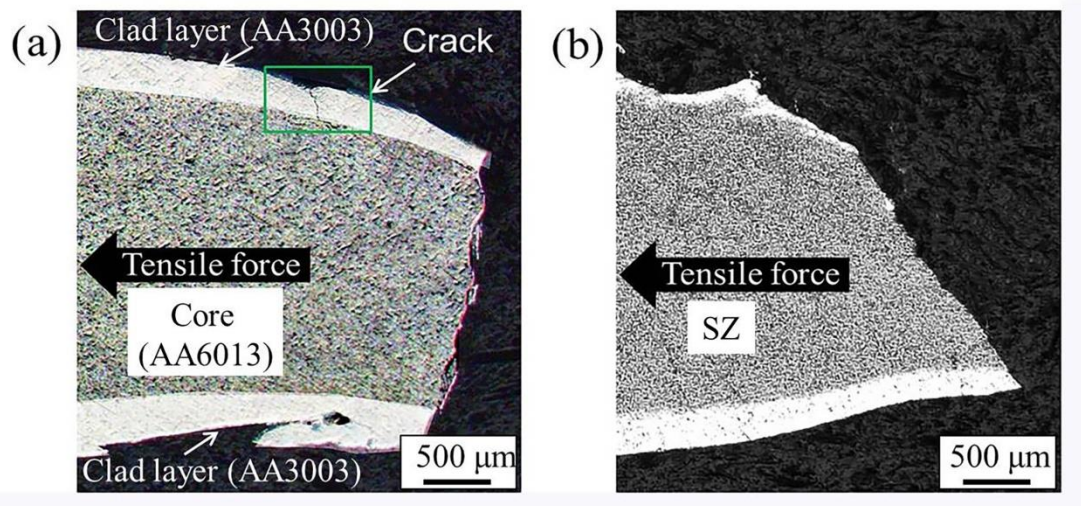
Cross-sectional images after tensile test: (a) BM, (b) all-weld joint
